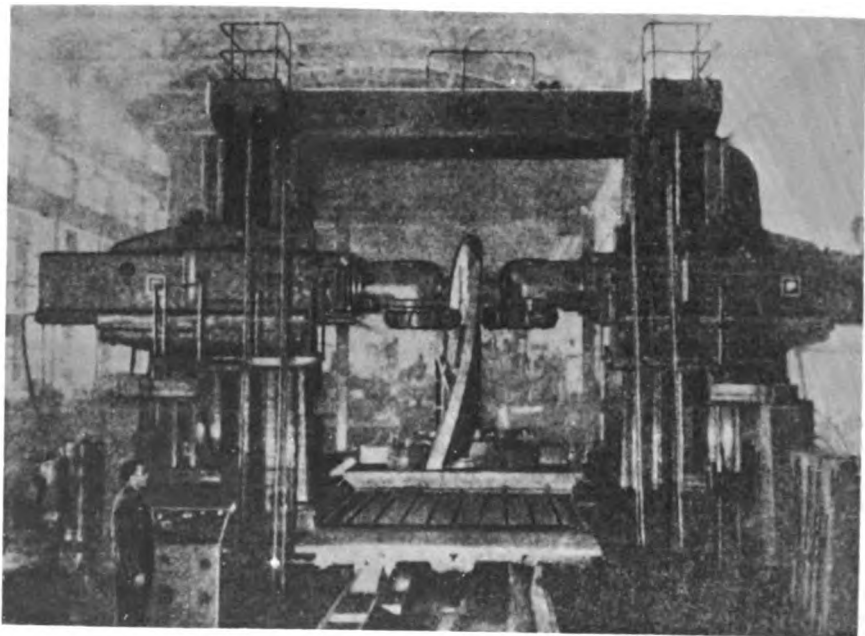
Special-purpose copying-milling machine for guide-vane surface-finishing
